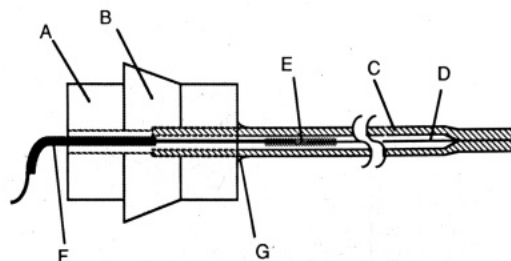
High-pressure electrode fitting and platinum microelectrode: A, 0.635 cm ($1/4$ -in.) diameter aluminum rod; B, aluminum ferrule; C, 0.2-cm Pyrex tube; D, 25- μm platinum wire; E, electrical solder; F, wire lead; G, epoxy seal. This assembly is mounted in a $1/4$ -in. tube to a $1/8$ -in. NPT stainless steel Swagelok fitting.
